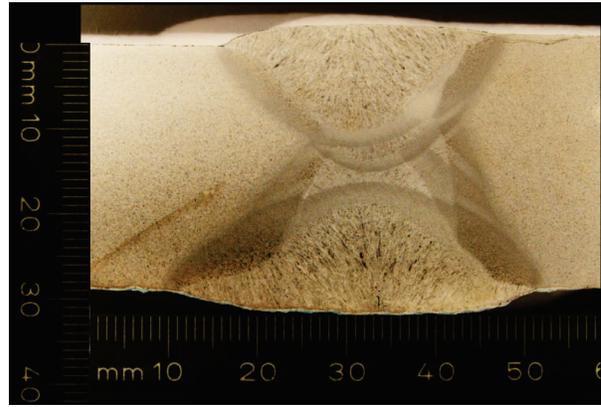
Circumferential weld cross section microstructure (Inside of vessel is bottom of image)
